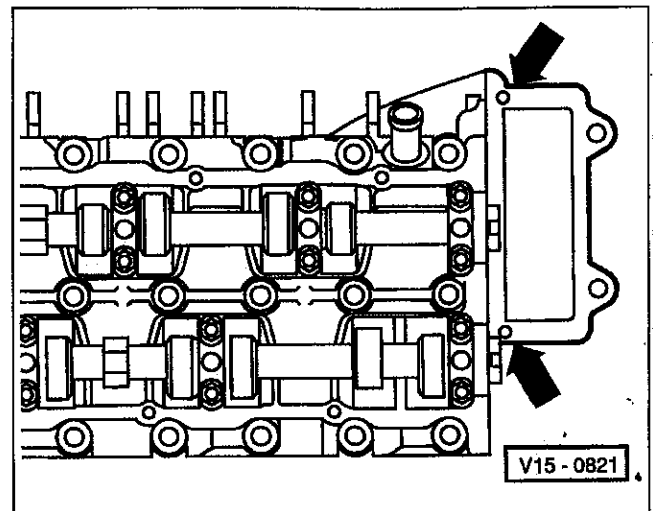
Clean out old sealer from 3 mm holes (arrows) and re-seal holes and gasket surface using Volkswagen sealant AMV 188 001 02 or equivalent.
